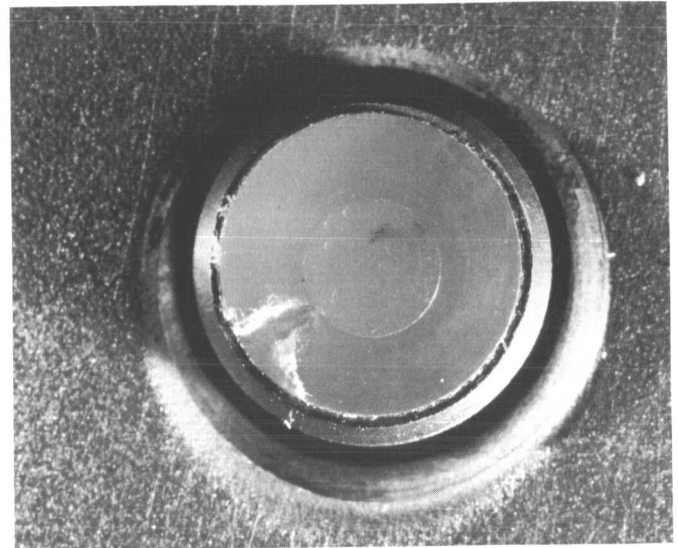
JPL seat 4 used in the SN-2 regulator (0.0135-in.-diam hole 0.015 in. deep), shown after failure
